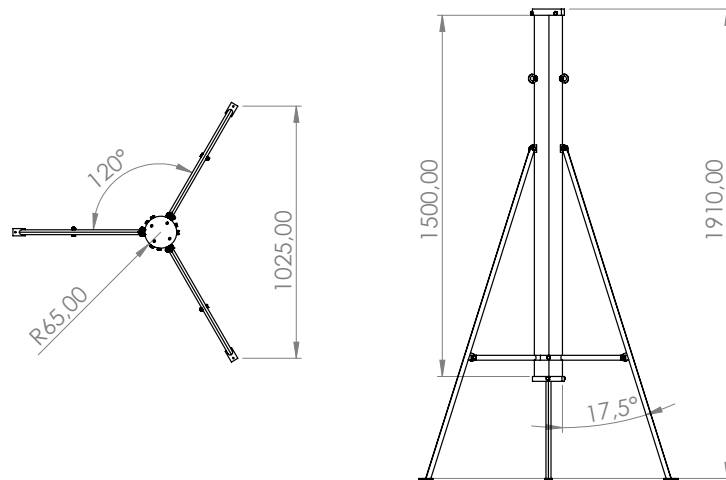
Test bed preliminary design - upper and lateral view, dimensions in millimetres
